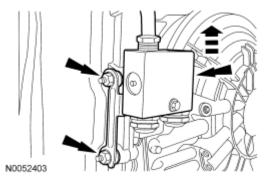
Locating Power Steering Pump Bolts Courtesy of FORD MOTOR CO.
